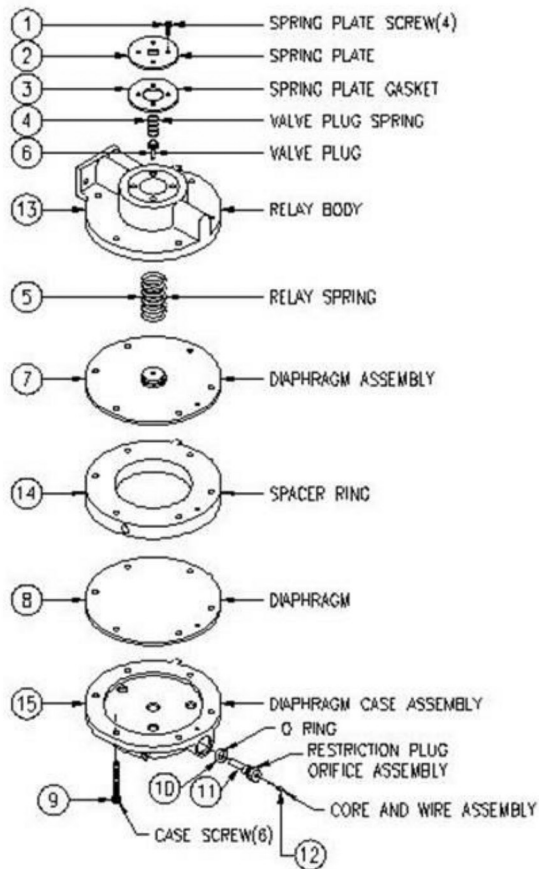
Exploded View of Pilot Relay used in Mark 4150 and 4160 Controllers
